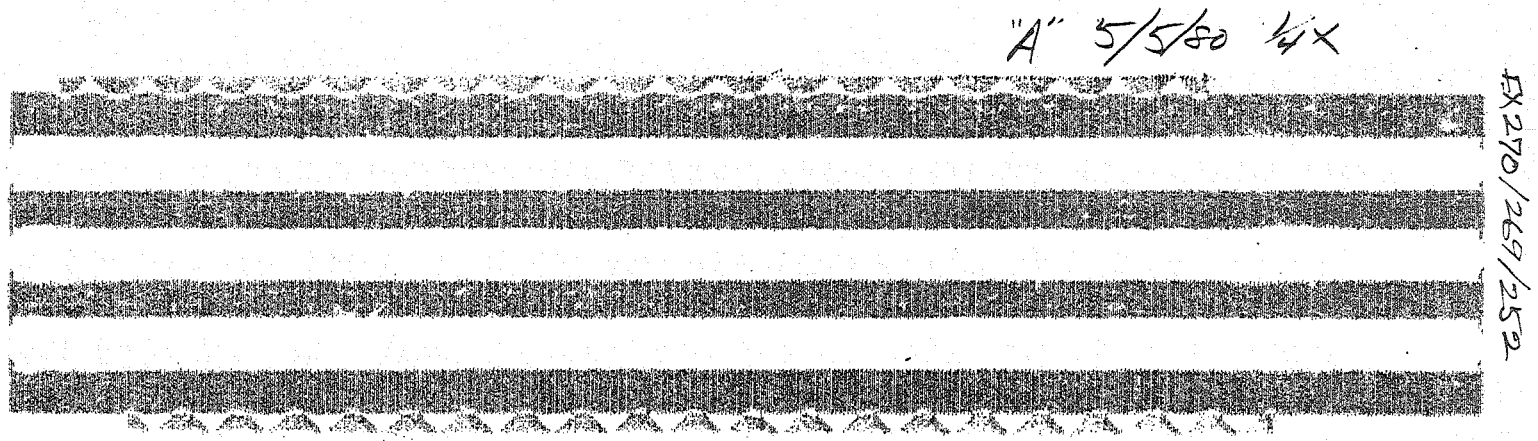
C-Scan of Stringer to Skin Bond Joints, Panel EX270/278/277
